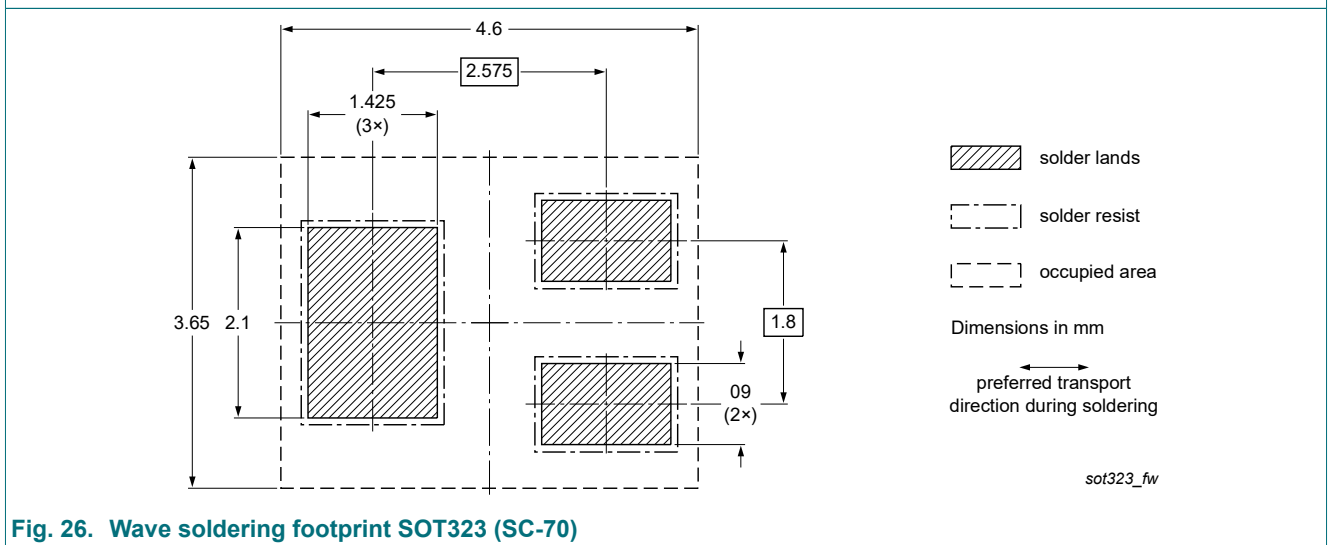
Wave soldering footprint SOT323 (SC-70)
